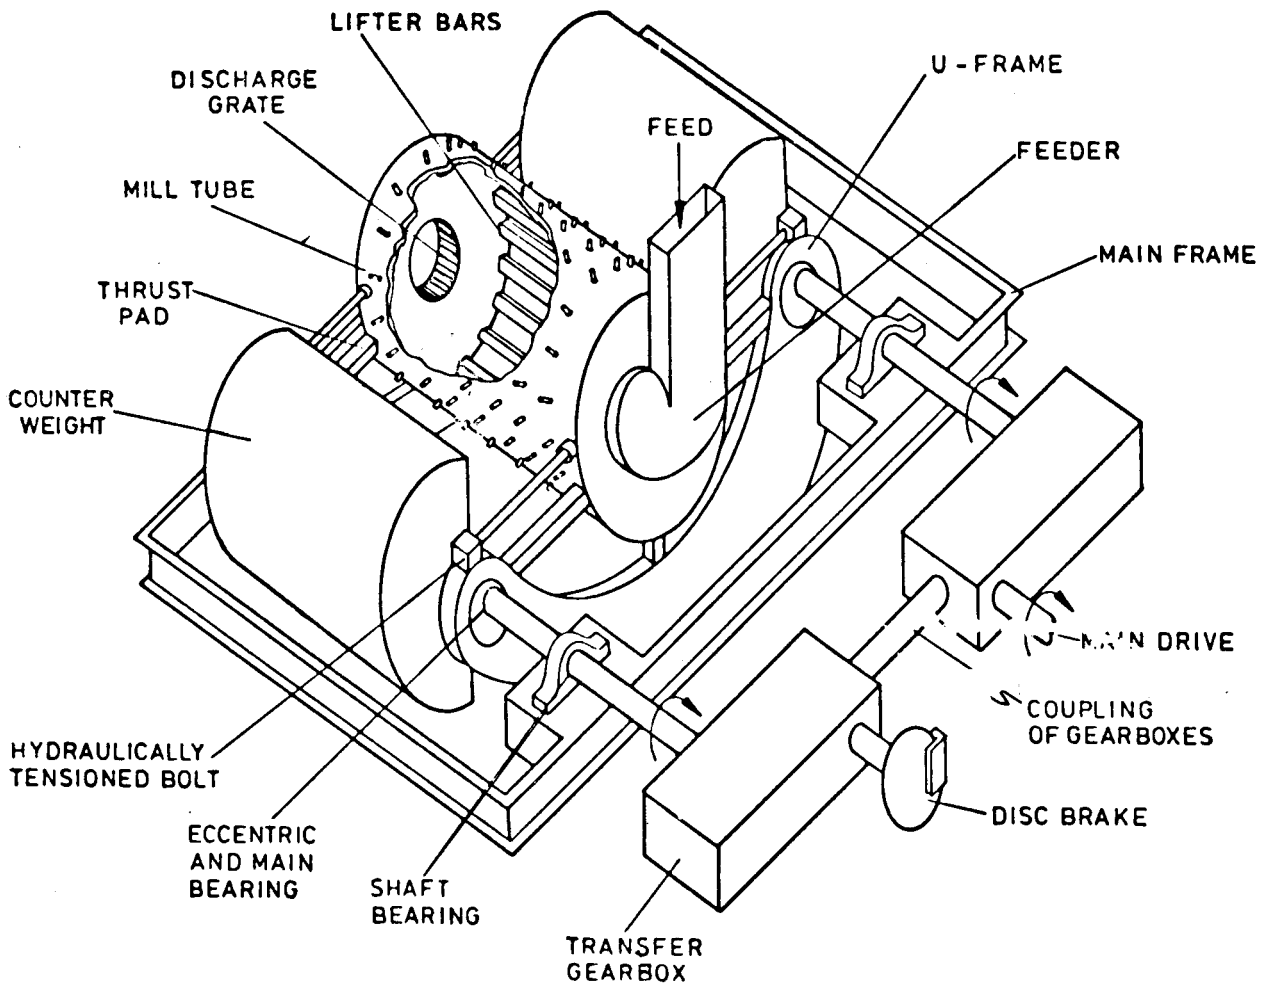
A diagrammatic view of the 1 MW centrifugal mill with 1 m diameter mill tube
